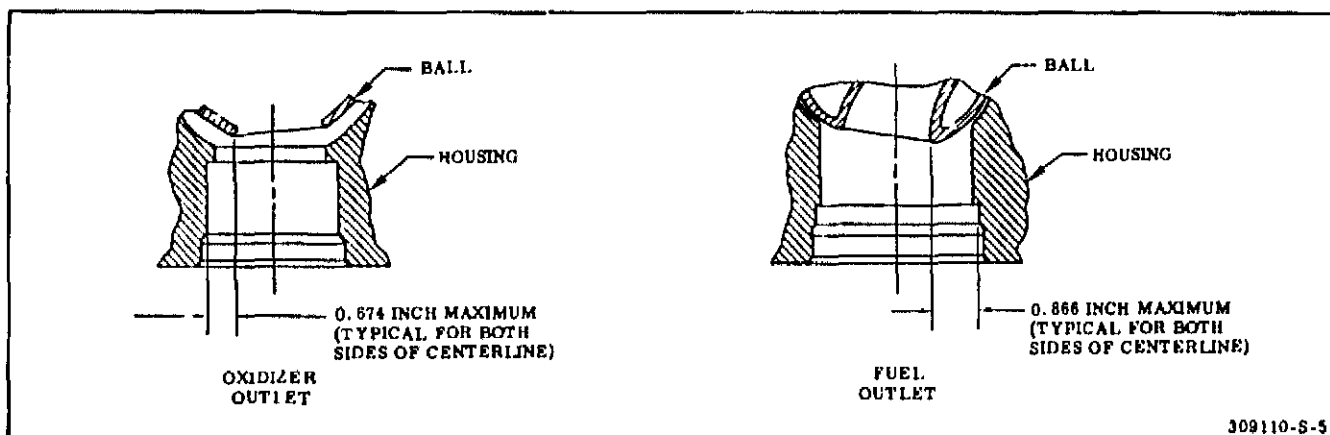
Gas Generator Ball Valve Ball Setting Check
